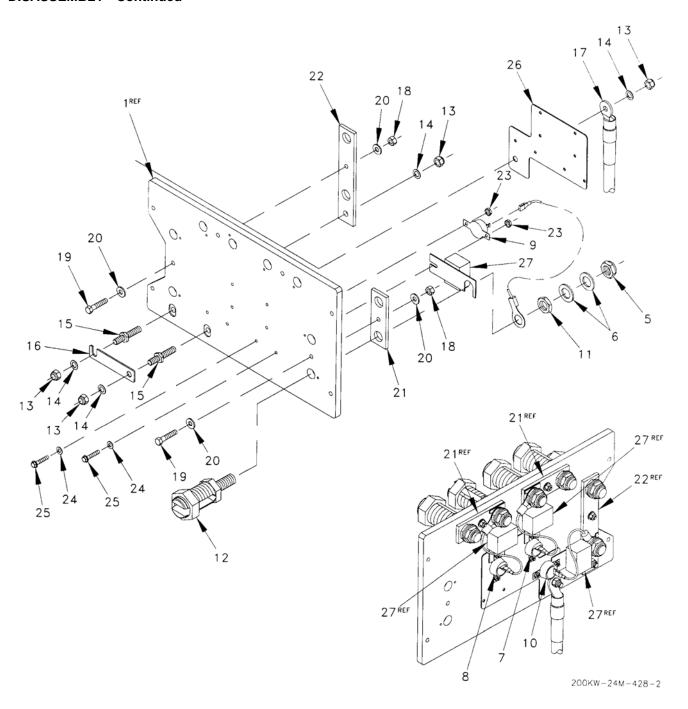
Load Terminal Board Assembly (Sheet 2 of 2).
